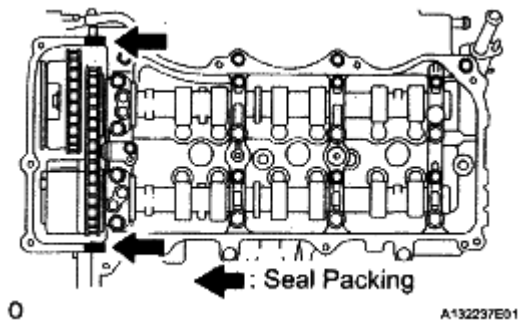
Identifying Cylinder Head Cover Seal Packing
